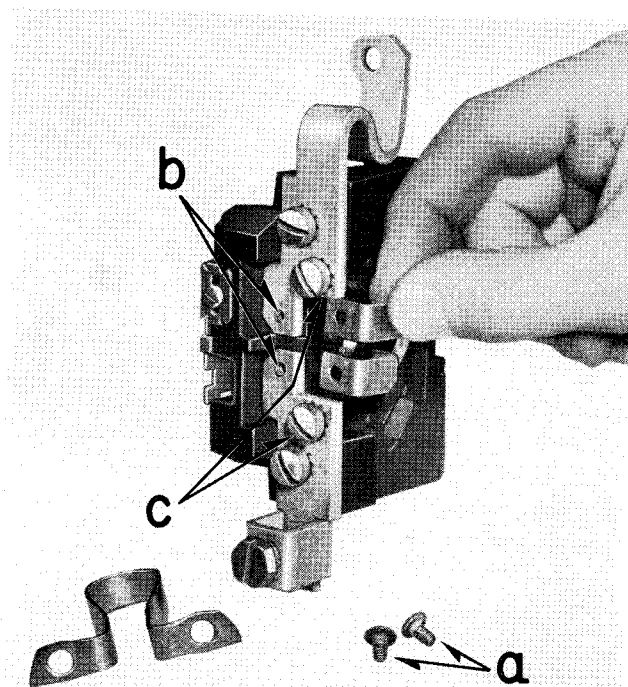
Install "B" code heater in the relay, using screws "a" threaded into holes "b". The "C" code heater (shown below relay) is held by larger screws "c". Be sure the looped portion enters the recess in the relay.
